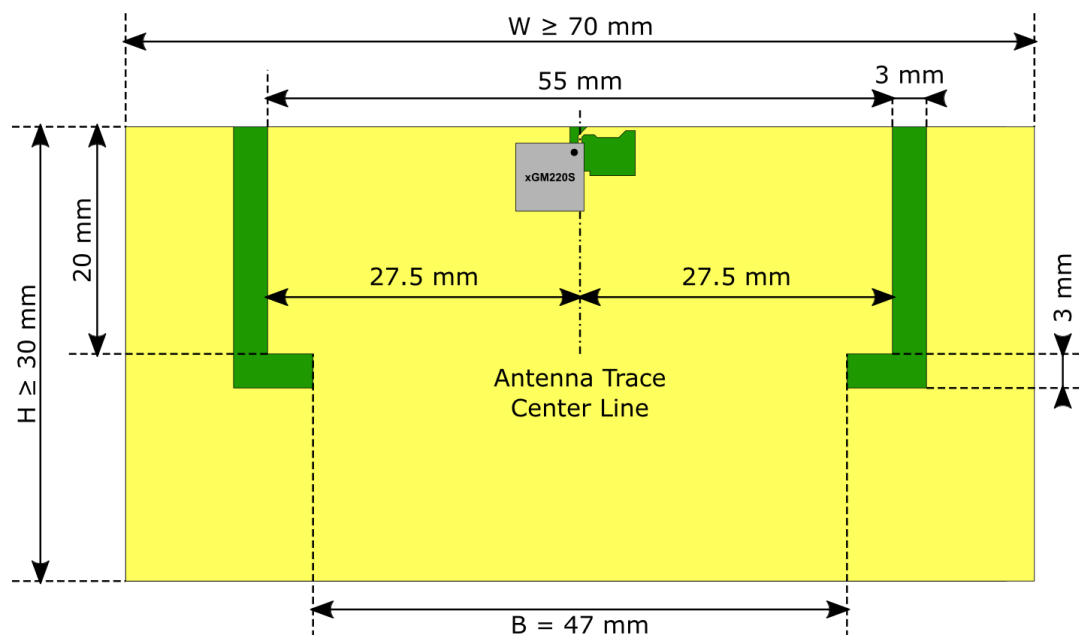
Recommended PCB Layout for Extended W & H Dimensions – L-Shaped Metal Keep-Outs
